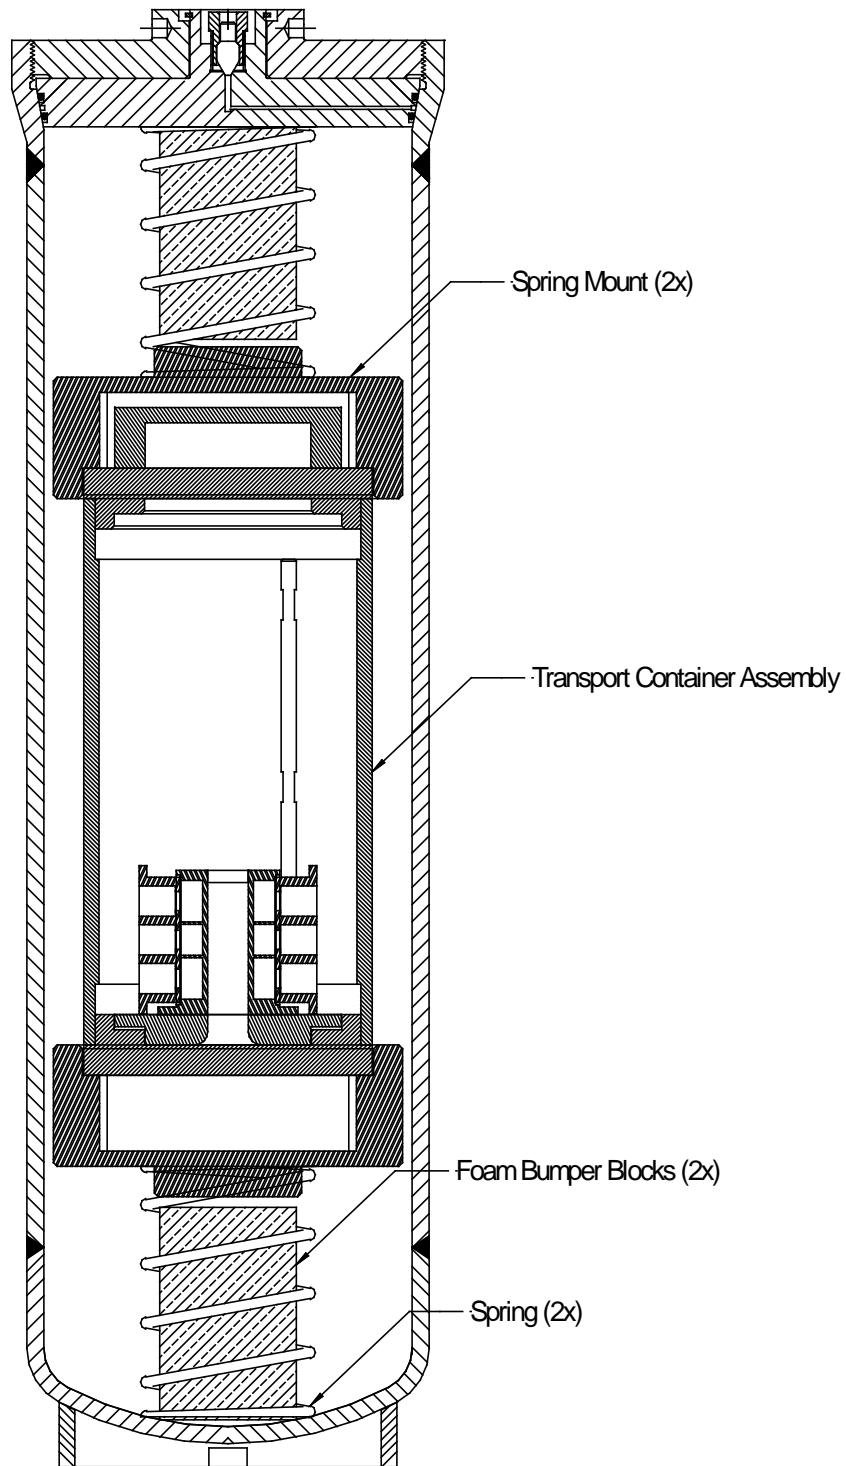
6CV w/ICE Apparatus Transport Container Assembly
